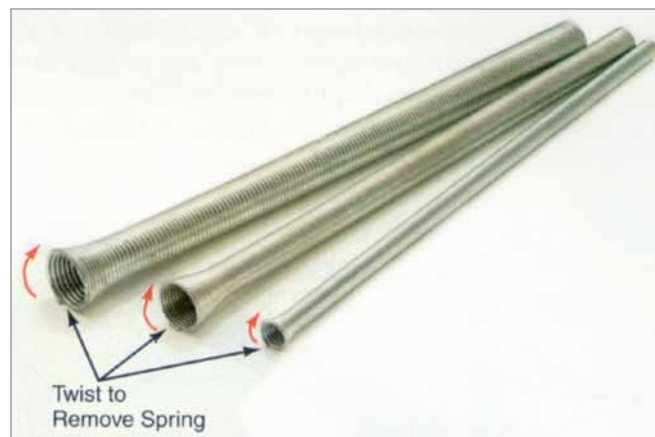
Three spring benders used for 1/4" through 3/4" tubing
